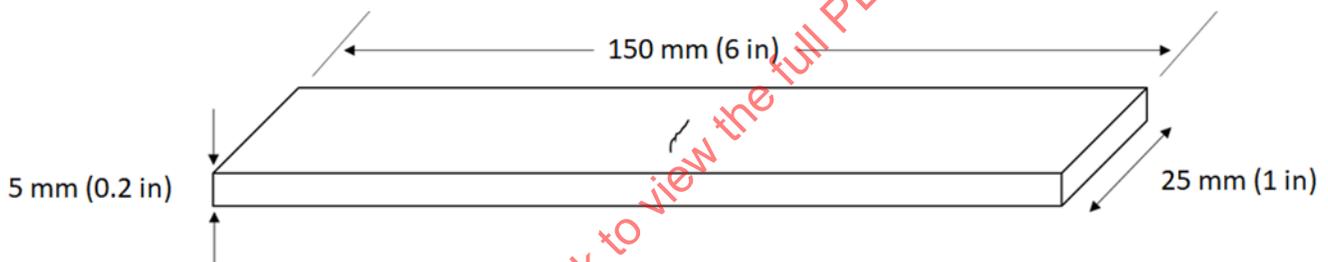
Fatigue crack specimen for the flaw-to-background test
